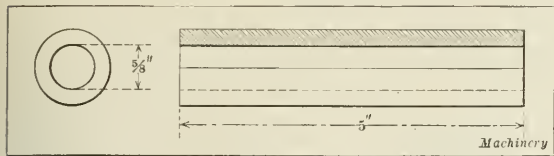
Machine-steel Piston-pin drilled with Compressed Air as Coolant
